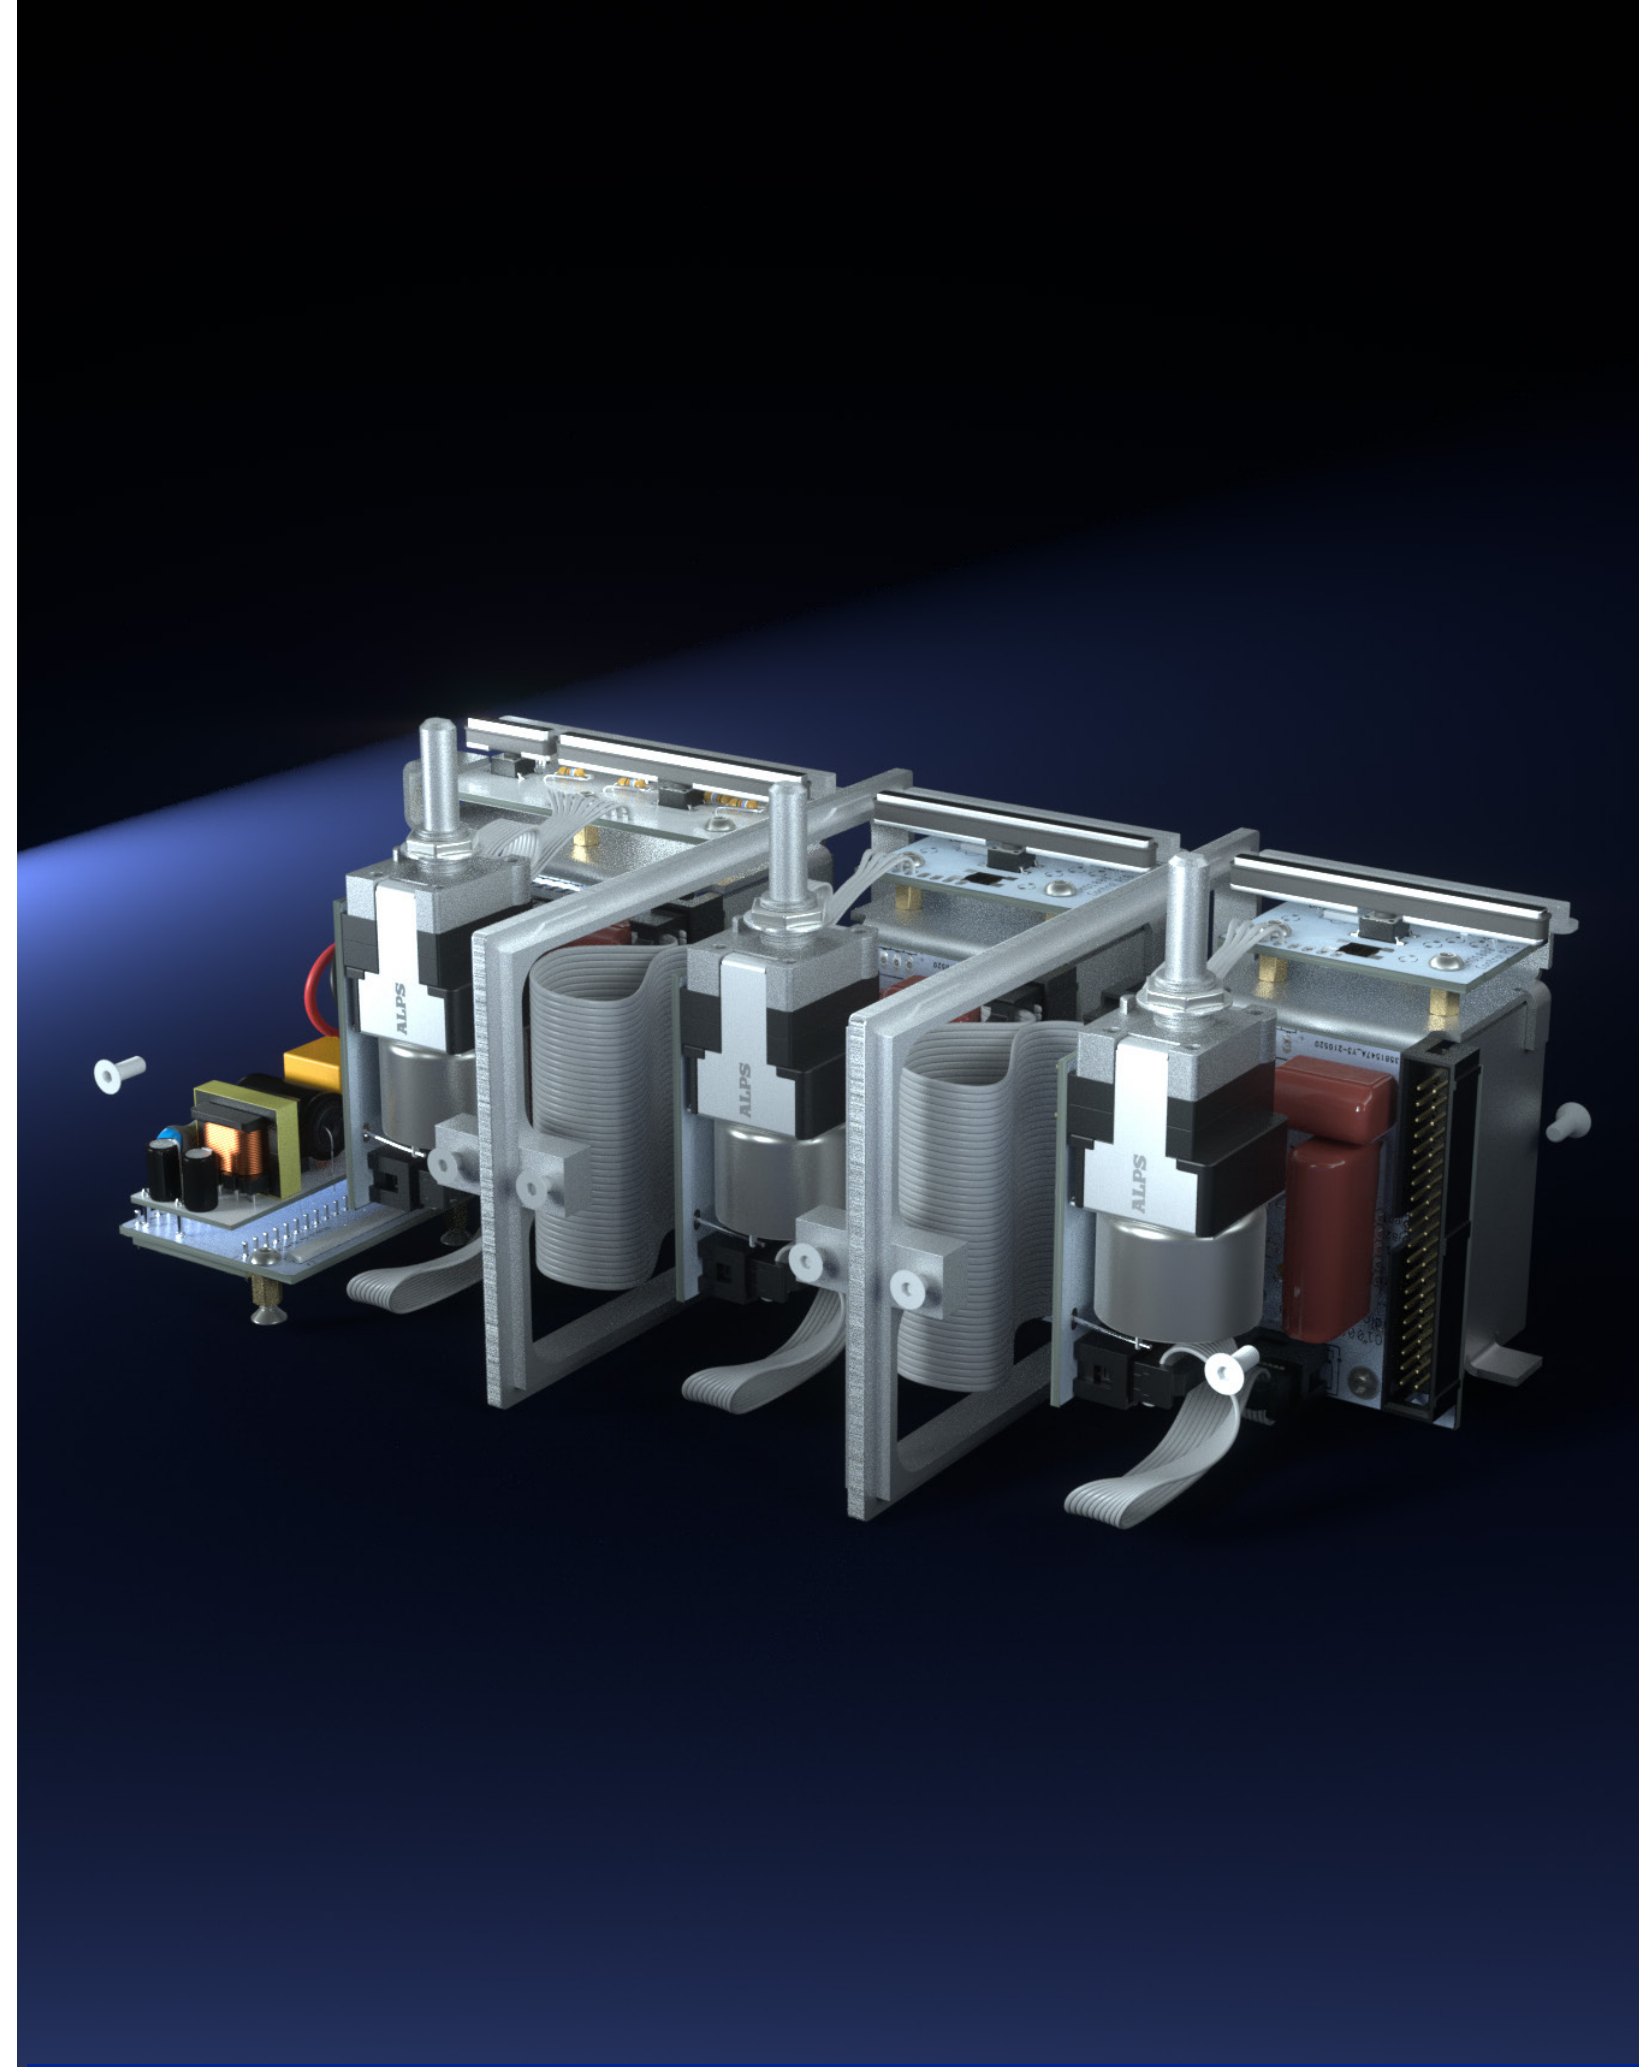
Full "naked" assembly of IMO-2000, showcasing the internal electronics and connections.
